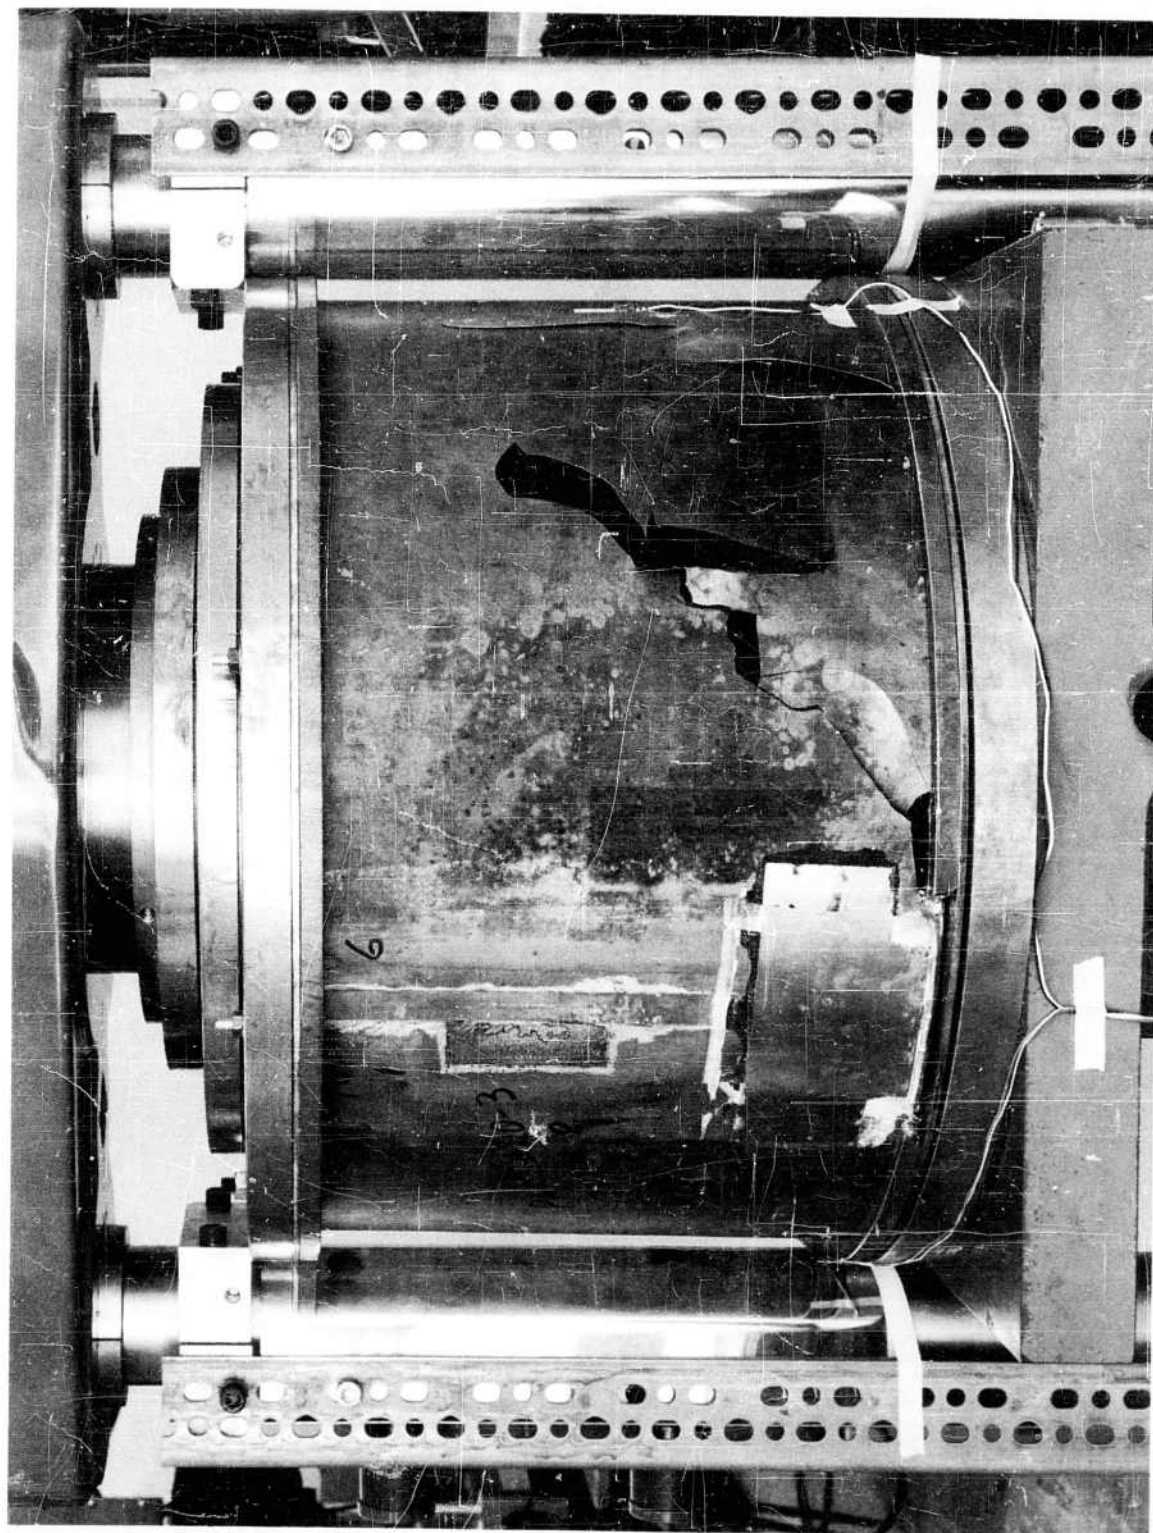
Cylinder-Loading Fixture and Specimen 14 After Test
